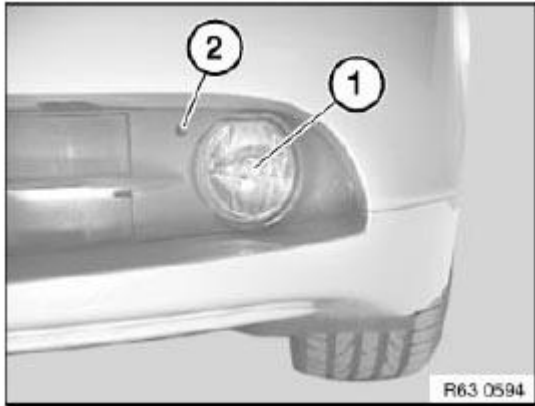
Identifying Fog Lamp And Adjusting Screw (Bumper Trim)
